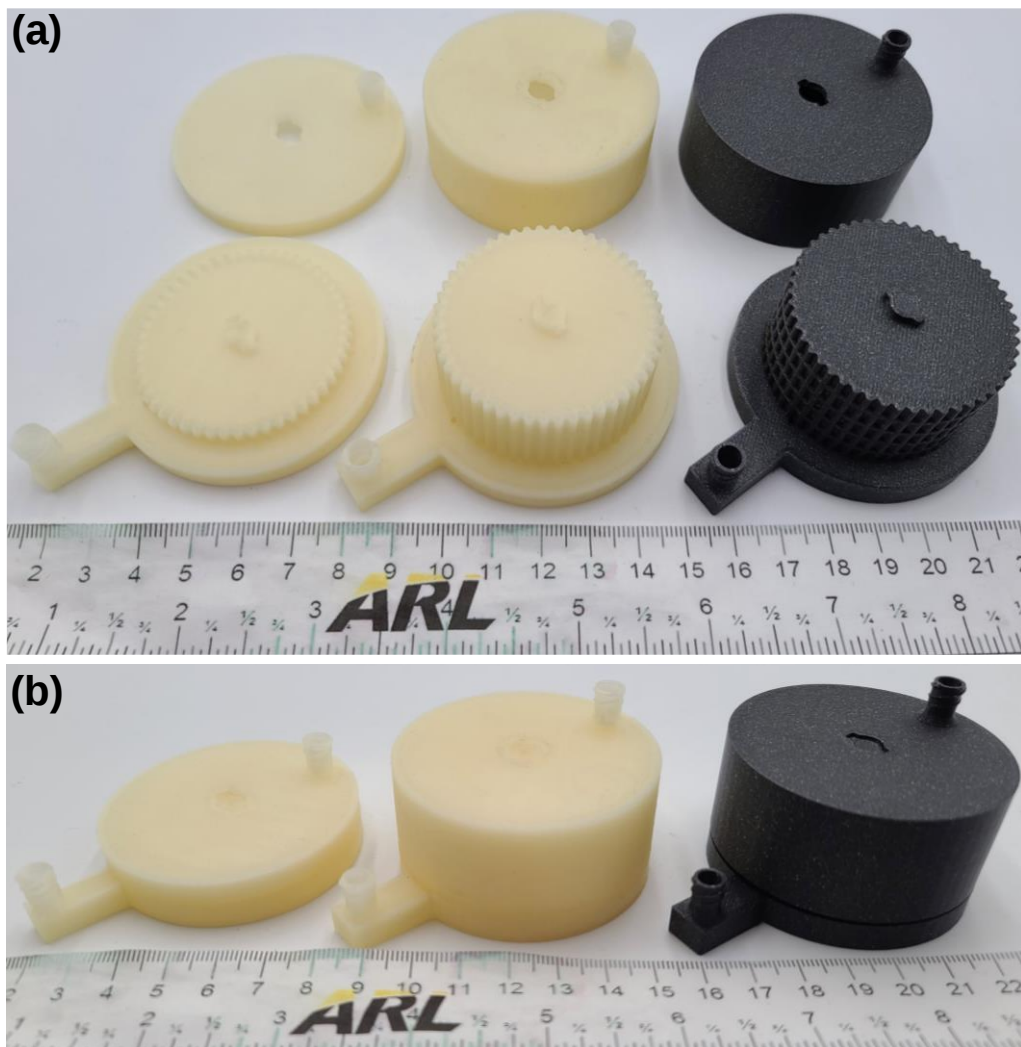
3D printed mold parts and their assembly. (a) From left to right: single-belt BVOH mold, five-belt BVOH mold, and five-belt PLA mold with their respective part B in the top row and part A in the bottom row. (b) From left to right: assembled single-belt BVOH mold, five-belt BVOH mold, and five-belt PLA mold.
